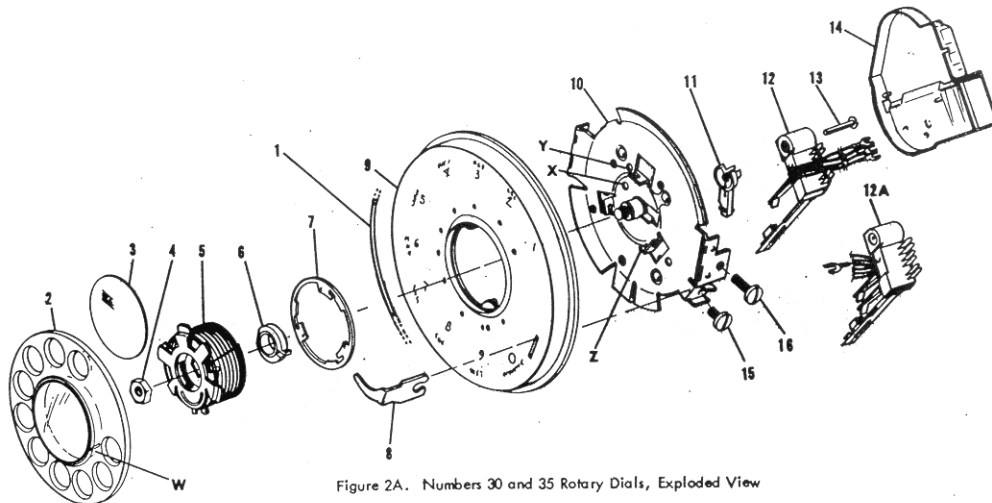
A. Numbers 30 and 35 Rotary Dials, Exploded View
